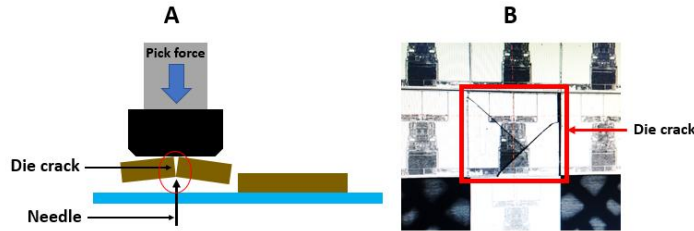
A. Die crack pick-up process; 4B. Actual die crack during picking of silicon die
